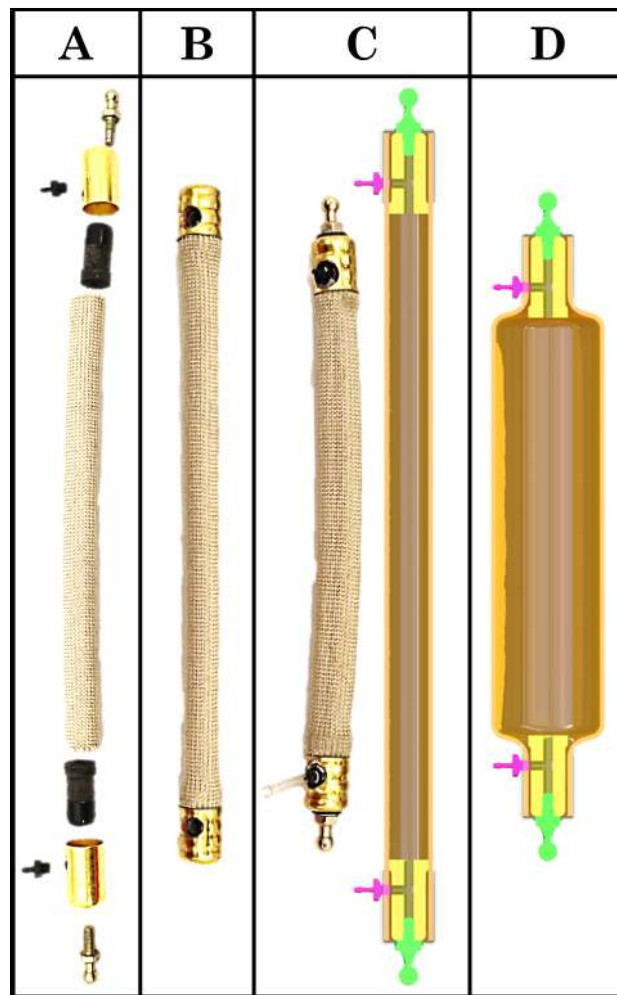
PAM design and assembly detail: (A) Individual components; The muscle tube, inserts, ferrules, fittings and ball joints. (B) PAM after the inserts have been fit and the ferrules swaged and drilled. (C) Final PAM with fittings and ball joints & CAD cross-section for detail. (D) CAD cross-section of the inflated PAM.
